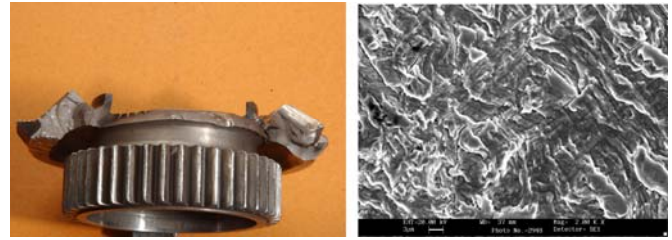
(a) Fracture Surface Showing Multiple Crack Origin, (b) Beach Marks Typical of Fatigue Failure
